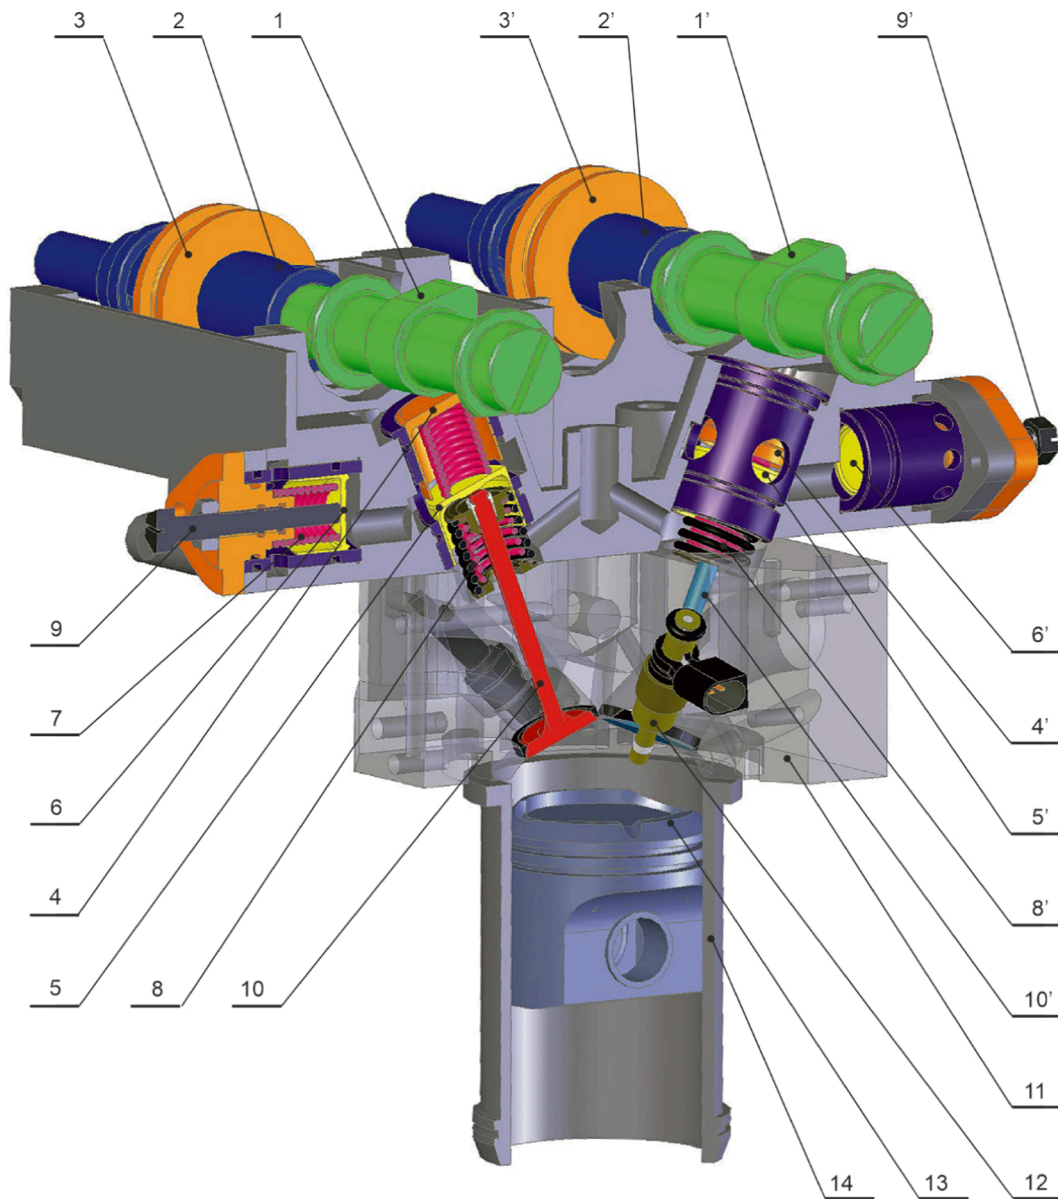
Research engine's cross-section [47]: 1 – camshaft, 2 – drive shaft, 3 – sliding sleeve, 4 – cam piston, 5 – valve piston, 6 – hydraulic accumulator piston, 7 – hydraulic accumulator spring, 8 – valve springs, 9 – valve lift regulating screw, 10 – valve, 11 – engine head, 12 – fuel injector, 13 – piston, 14 – cylinder liner.
